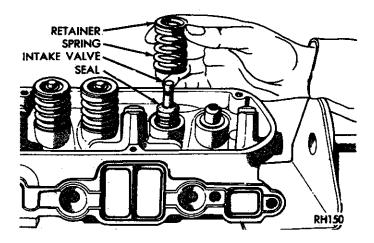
Installing Valve, Cup Seal, Spring, and Retainer
